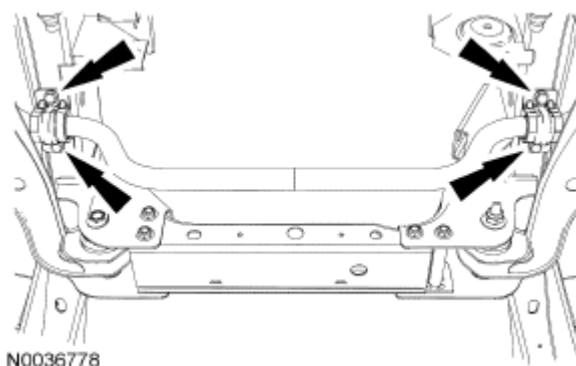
Locating Stabilizer Bar Bracket Bolts
